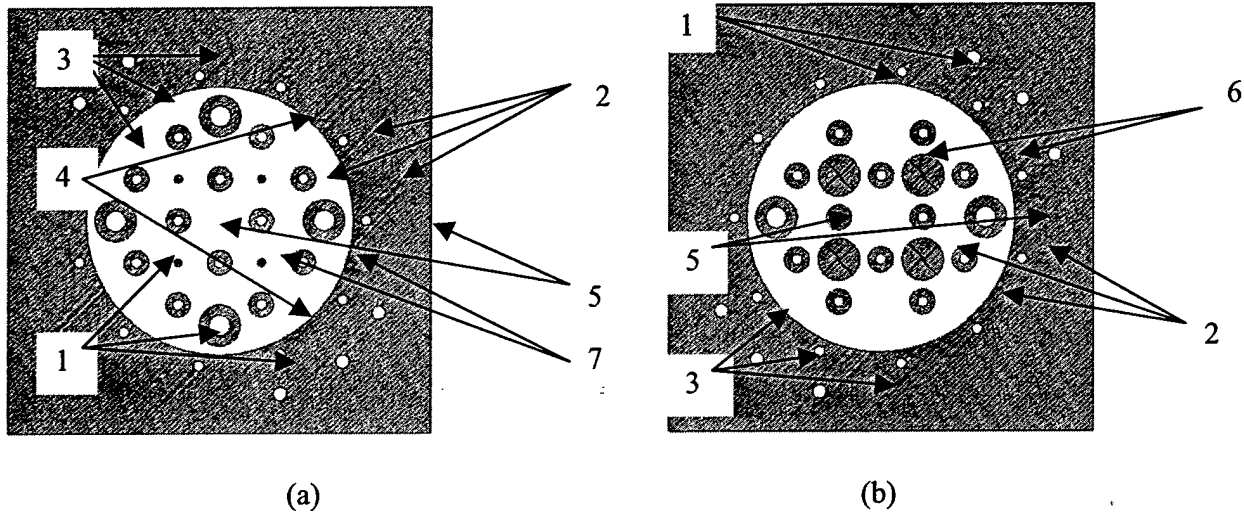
CAD drawing of UV mask for (a) fuel and (b) air. The shaded areas will eventually be electroplated nickel. [1] are fastener holes, [2] are fastener holes with isolation cylinders to prevent leakage within the reservoirs. [3] are holes for alignment pins. [4] are high-pressure passages, and [5] are low-pressure routes. [6] are air swirlers and [7] are fuel swirlers.
